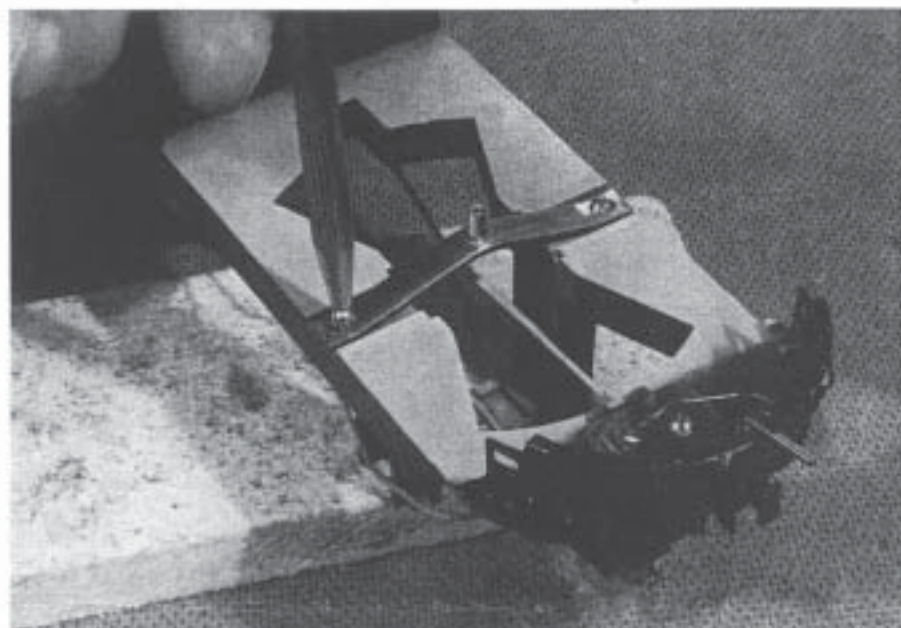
For some unknown reason, the underframe already has a molded groove and screw holes that are exactly where they should be in order to mount the new brass bolster properly. It is a good idea to check the fit of the bolster before assembling it into the truck.
